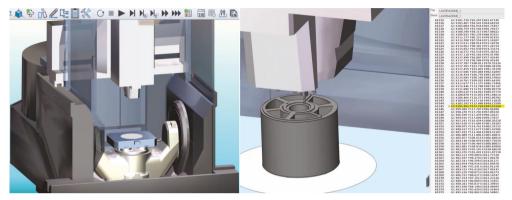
5-axis machine tool (table-table configuration) as 3D printer (source: www.roboris.pl)
